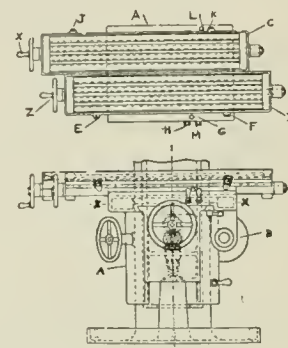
ARRANGEMENT OF TWO TABLES FOR MILLING
